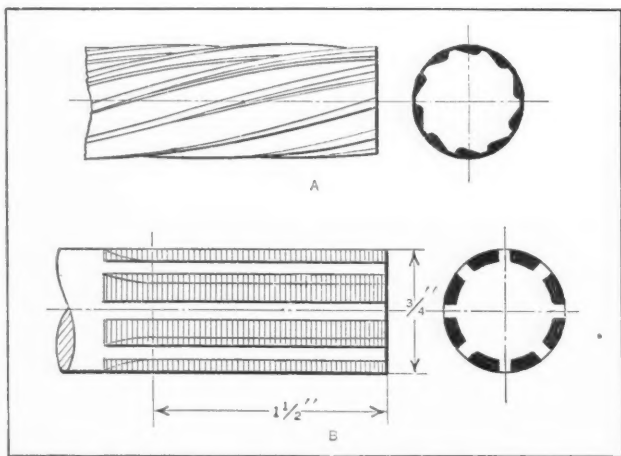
(A) Spiral-fluted Work Produced with Equipment Shown in Fig. 1; (B) Example of Work Produced on Machine Shown in Fig. 4
